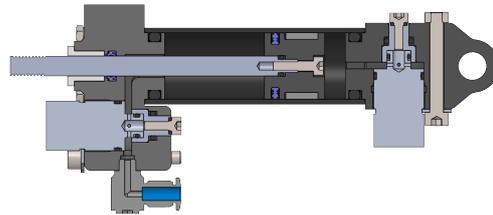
Section view of the final design of the integrated pneumatic cylinder
